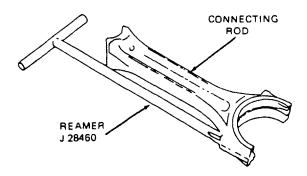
Connecting Rod Bolt Hole Reamer.
